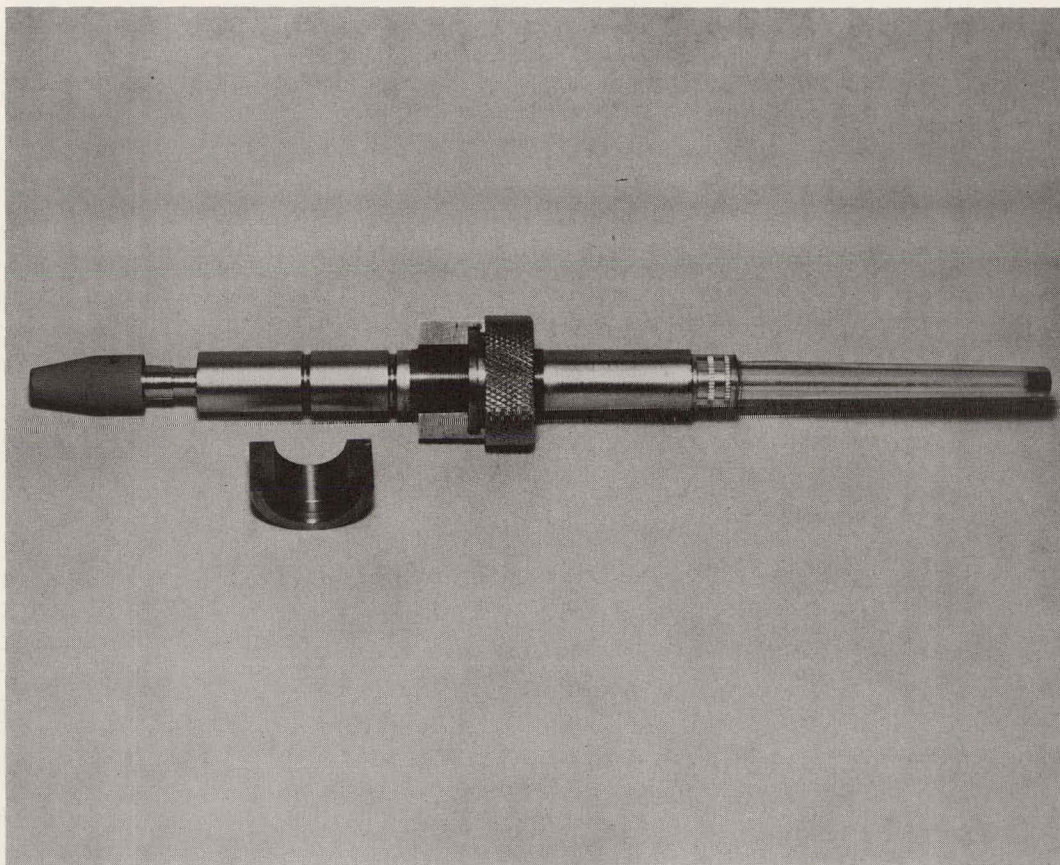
Special Allis-Chalmers Design Welding
